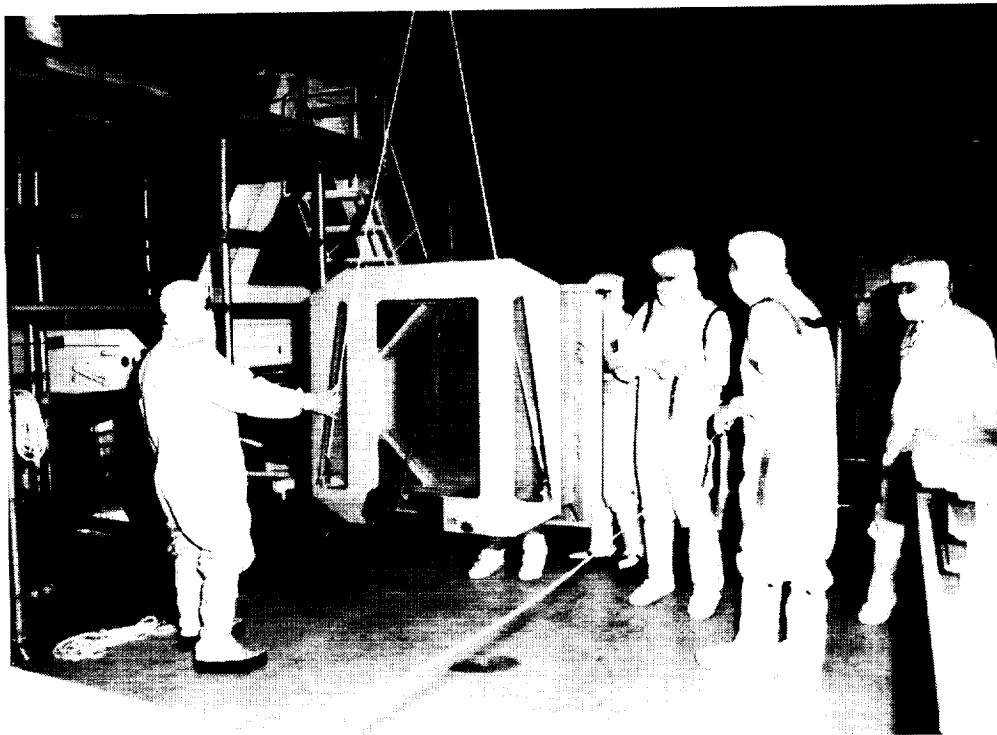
Tray being inspected prior to being placed on rotator. (Photo L-90-03082)
